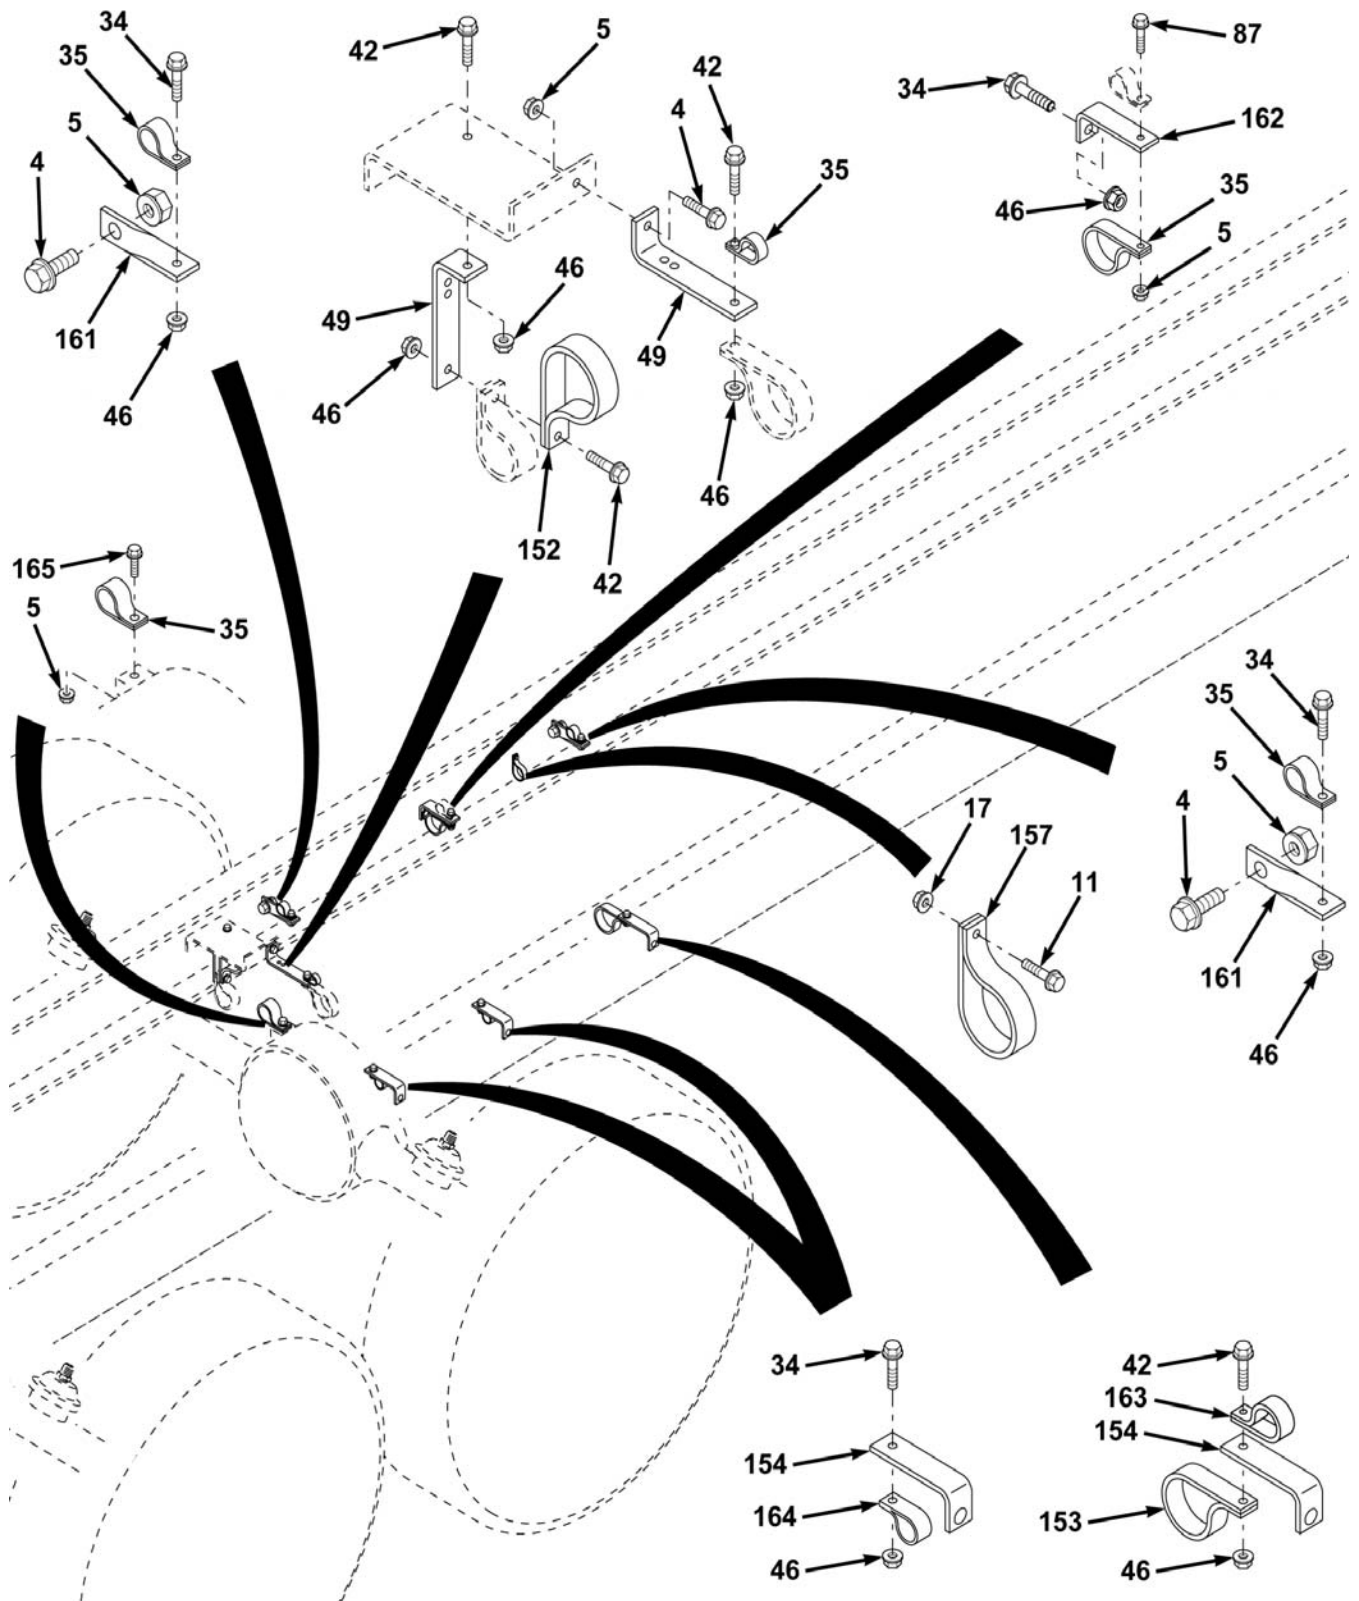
CHASSIS AIR (SHEET 12 OF 15)
